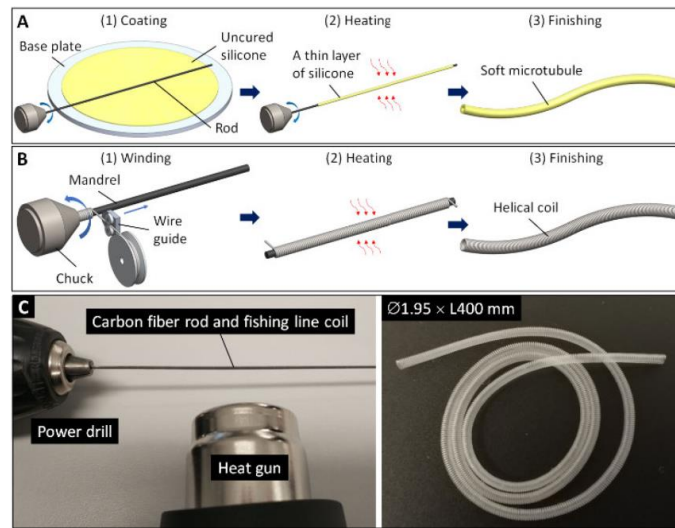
Fabrication of extension actuators using power drills [1-2]
